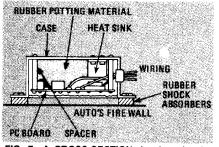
A CROSS-SECTION drawing showing the shape of the case and how the PC board is suspended on four spacers.
